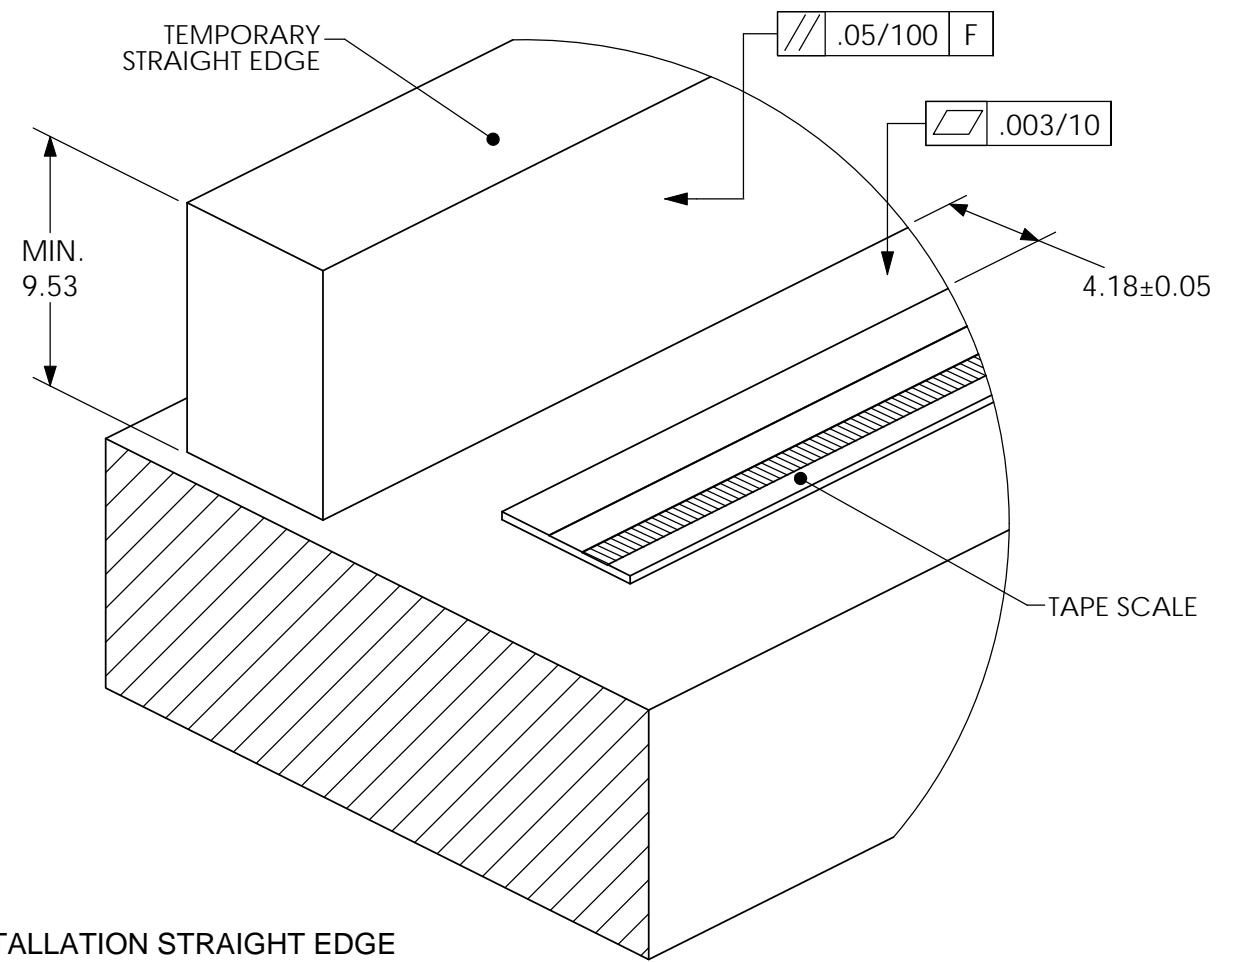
INSTALLATION STRAIGHT EDGE
